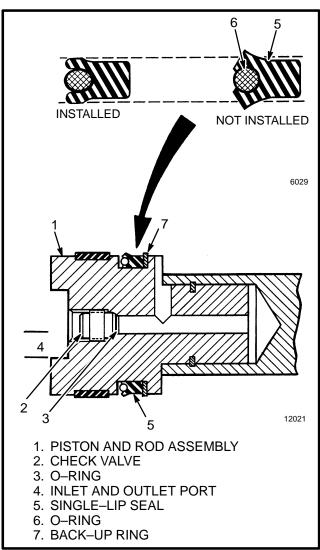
INTERNAL CHECK VALVE AND SINGLE LIP SEAL
